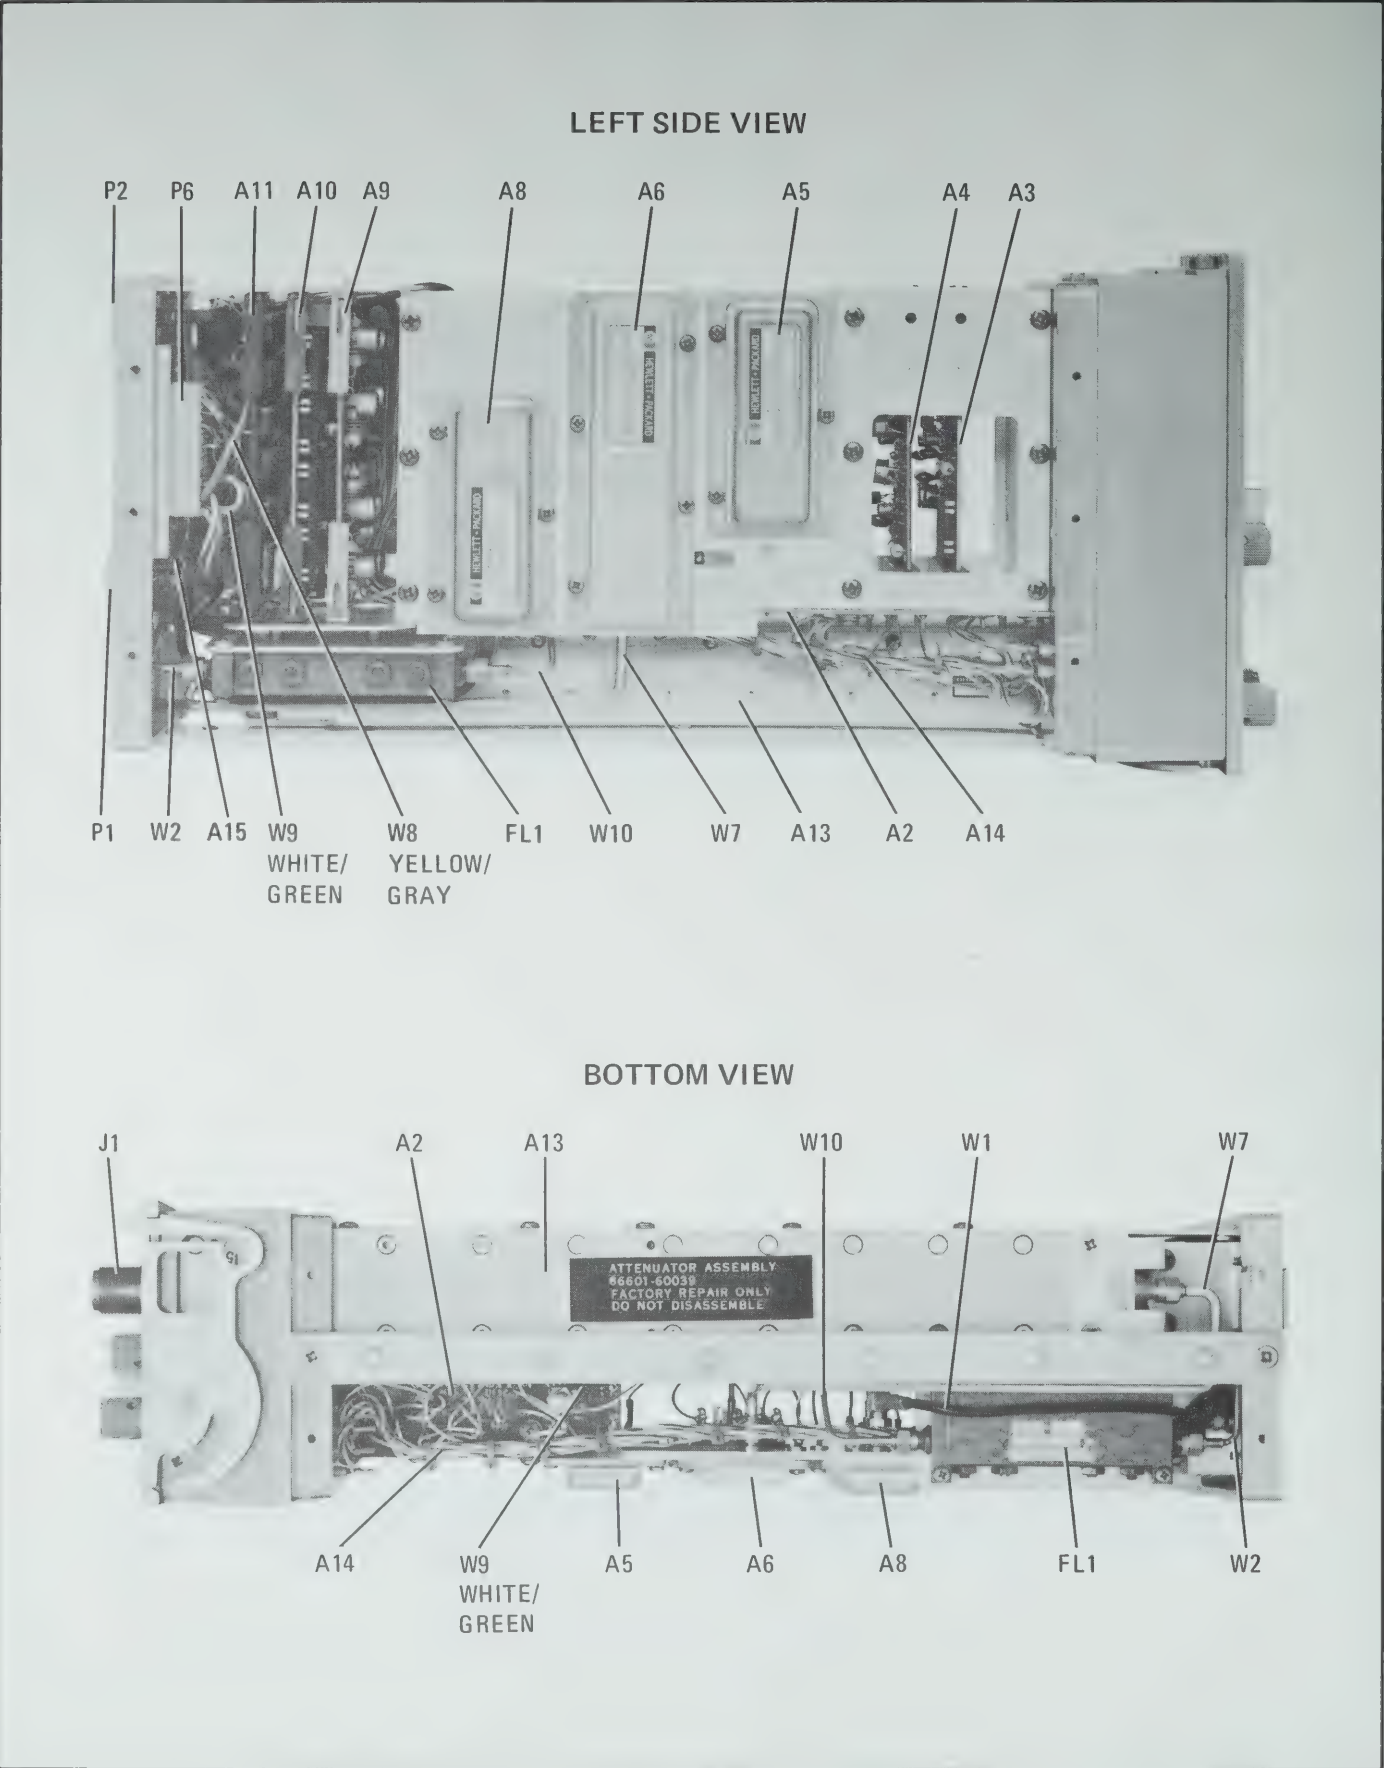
86602A Test Points and Assemblies (1 of 2)
